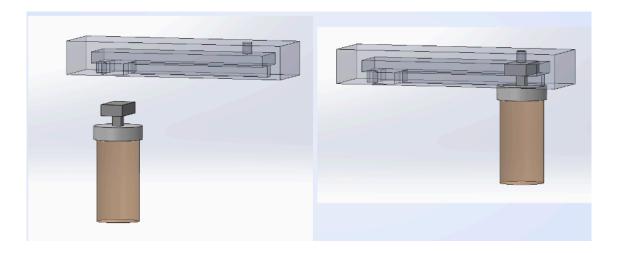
CAD mockup of the magnetic lock/slider design, including a pill bottle with a preliminary cap to demonstrate the sliding mechanism.
